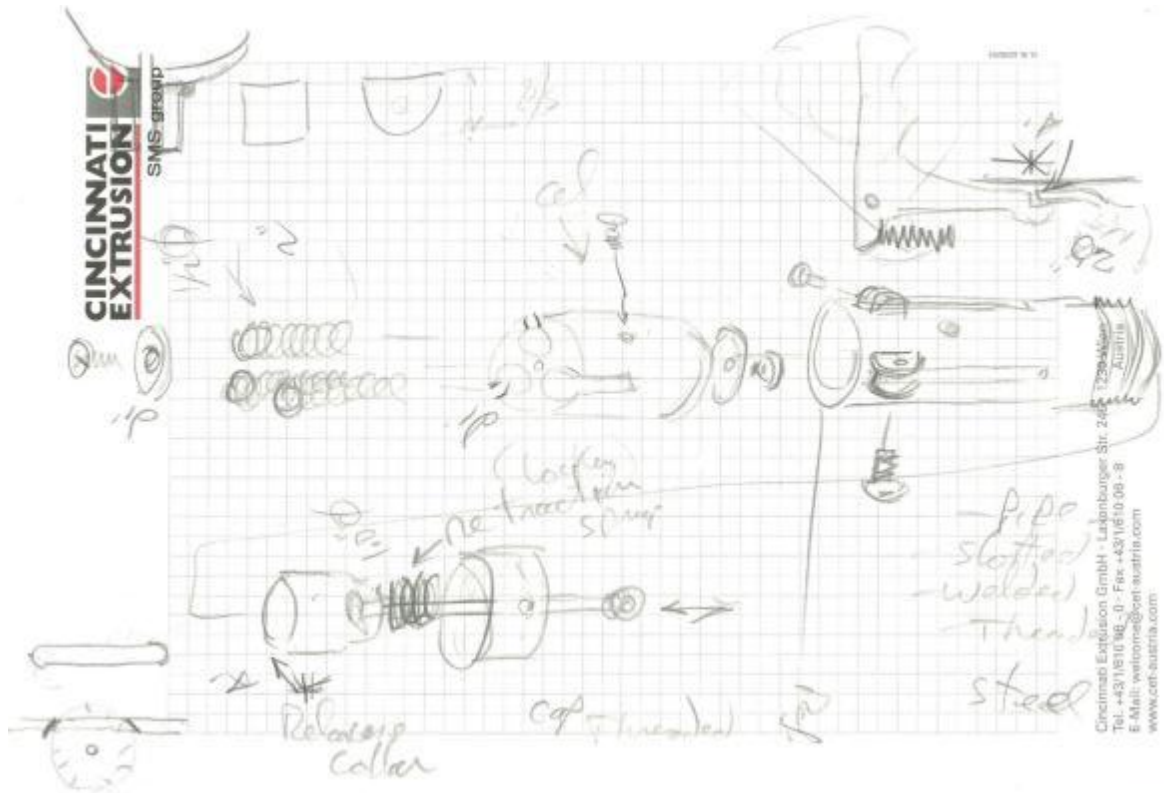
Sketch of the reset spring cylinder and design of assembly.
